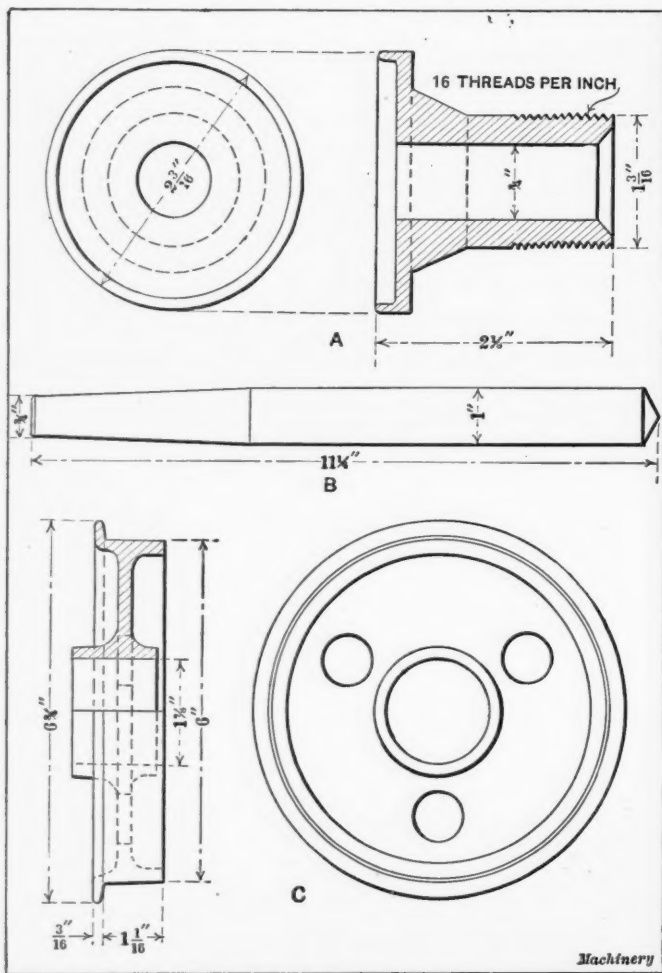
(A) Phosphor-bronze Bearing. (B) High-speed Steel Drill Blank (C) Cast-iron Flanged Wheel
